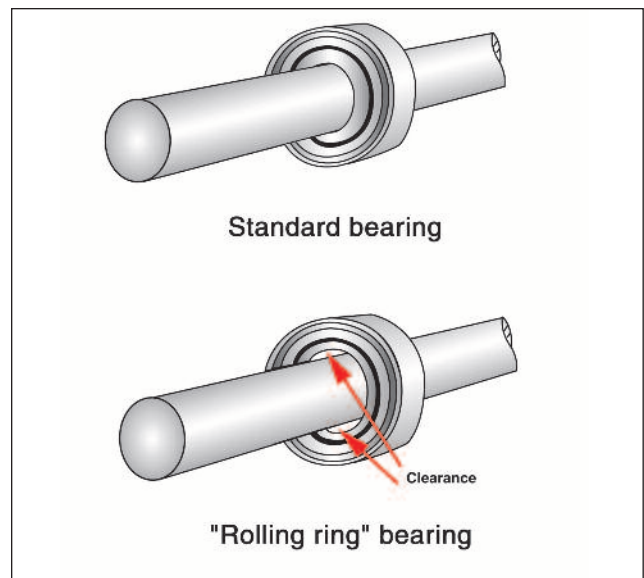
A standard ball bearing on a smooth shaft will not pivot whereas the central ridge on a rolling ring bearing provides a natural pivoting point. Pivoting the bearing enables control over linear pitch and traversing direction.
